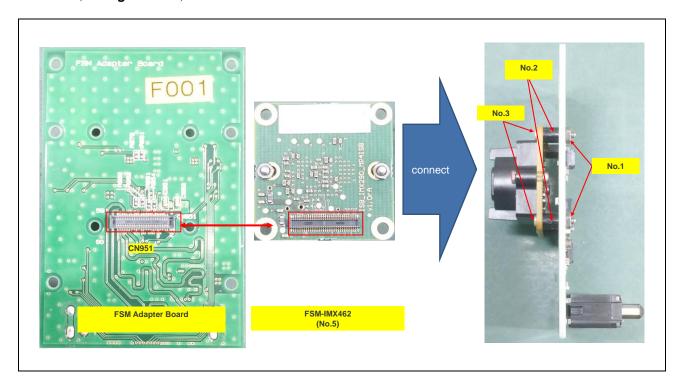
Connect FSM Adapter Board to FRAMOS Sensor Module (FSM-IMX462)
